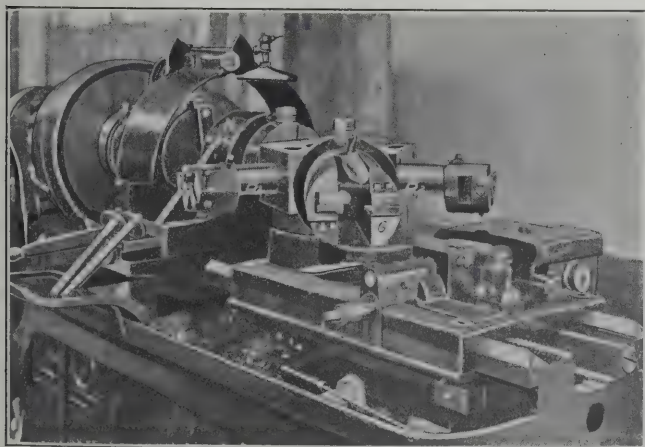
Rough-turning and Centering the Spindles on the Potter & Johnston Automatic Chucking Machine
